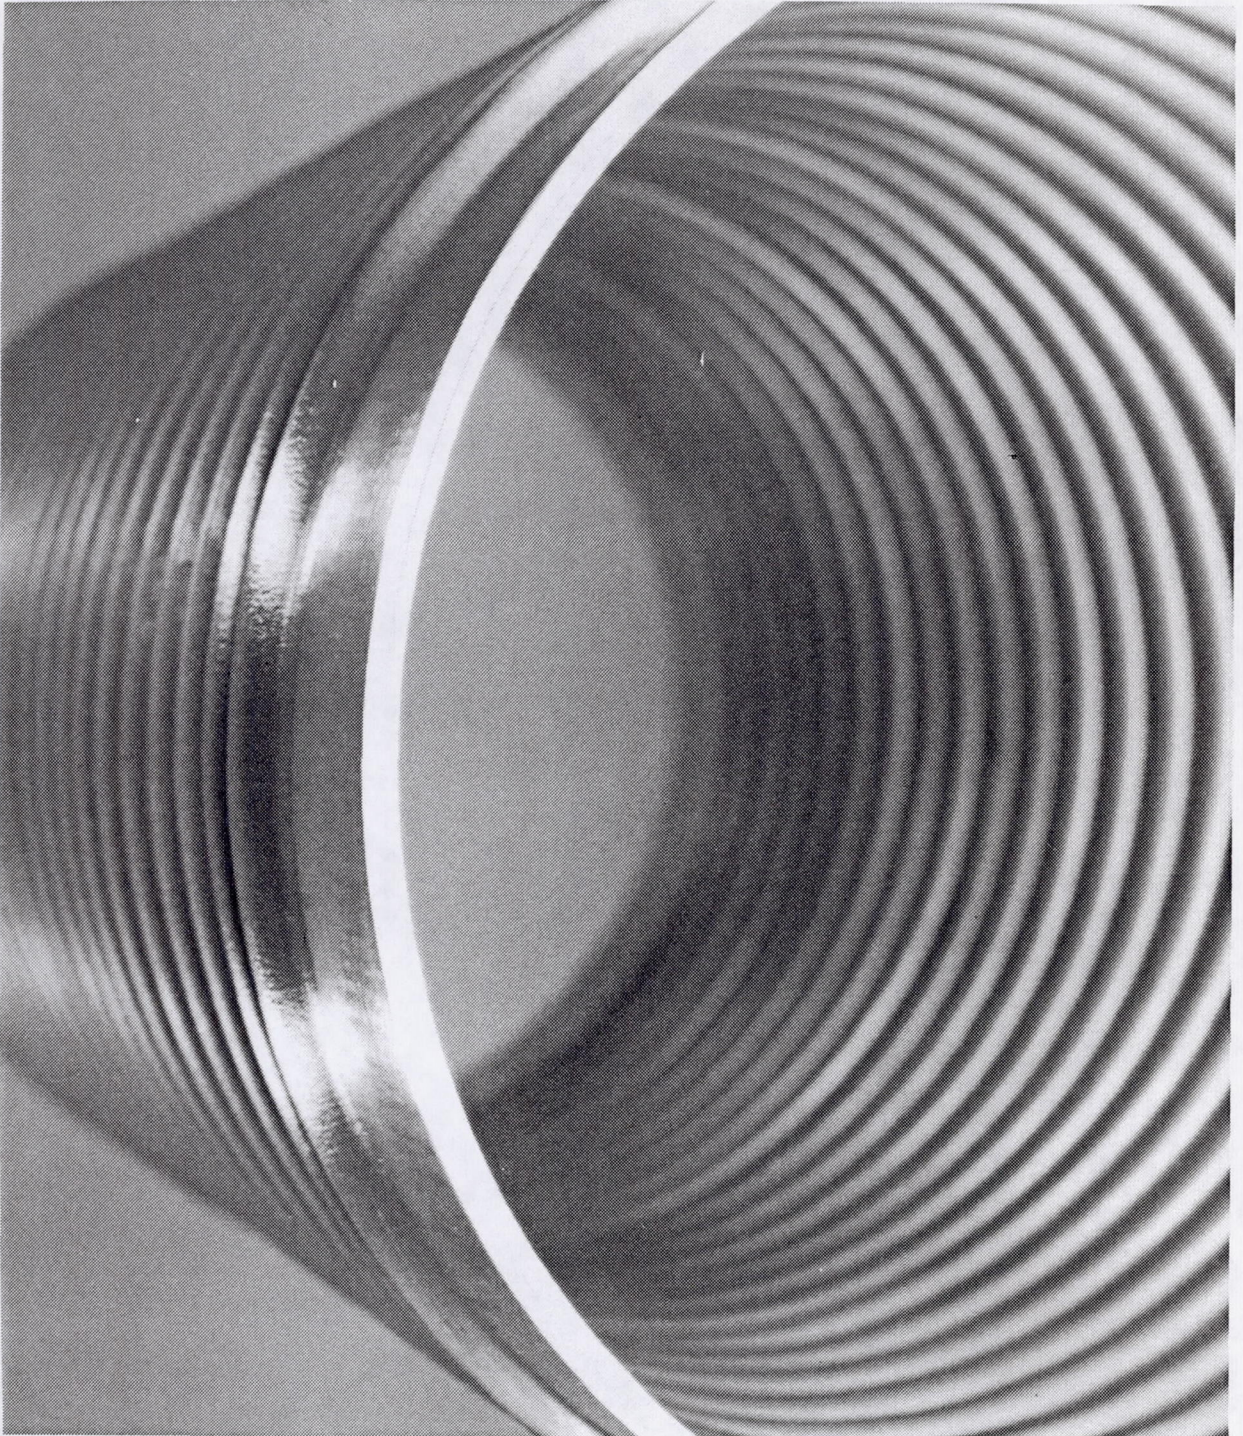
Inner and Outer Weld Rings Installed on the Straight Section of Bellows for Termination Weld to End-Caps
